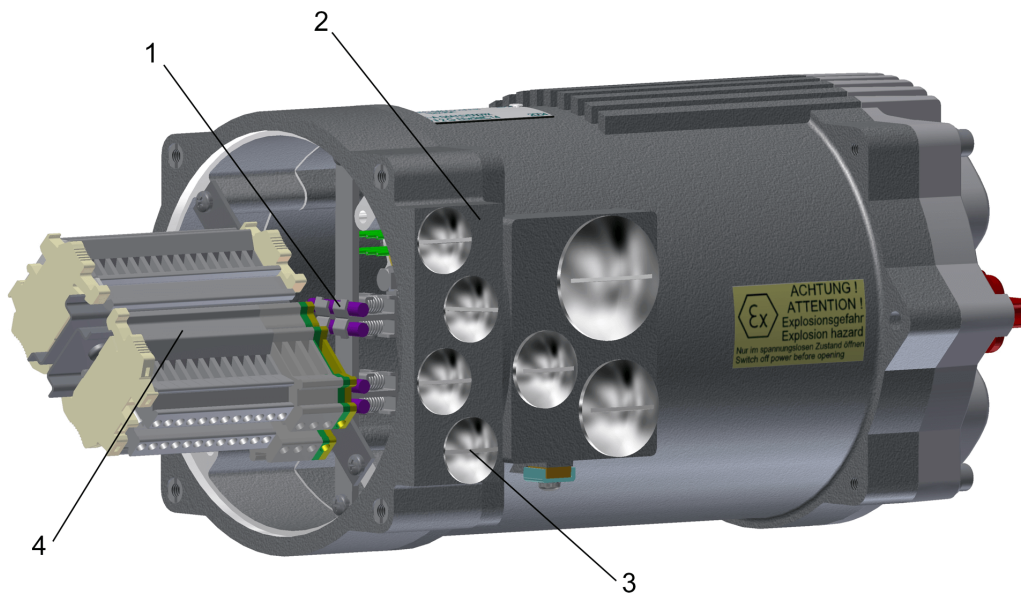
1... shielding connection clamp, 2... additional frame, 3... metallic cable glands (closed with blind screw connections at delivery) 4 xM20x1,5, 4... terminal strip
